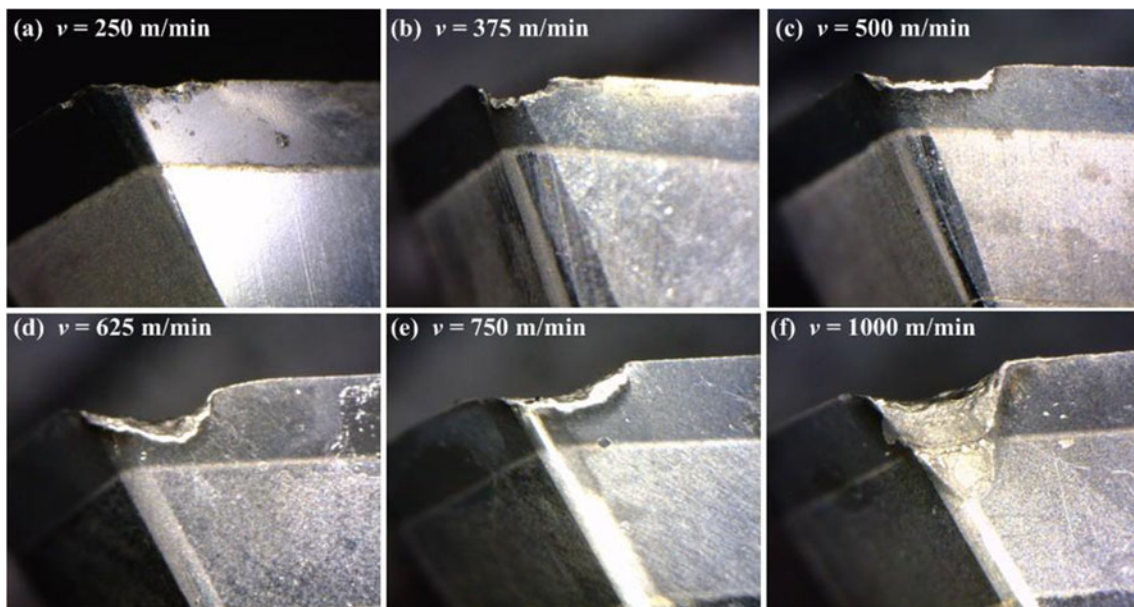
Flank faces of PCD tools in high-speed milling of Ti-6Al-4V alloy ($a_p=0.5$ mm, $f_z=0.05$ mm/z, $a_e=25$ mm)
